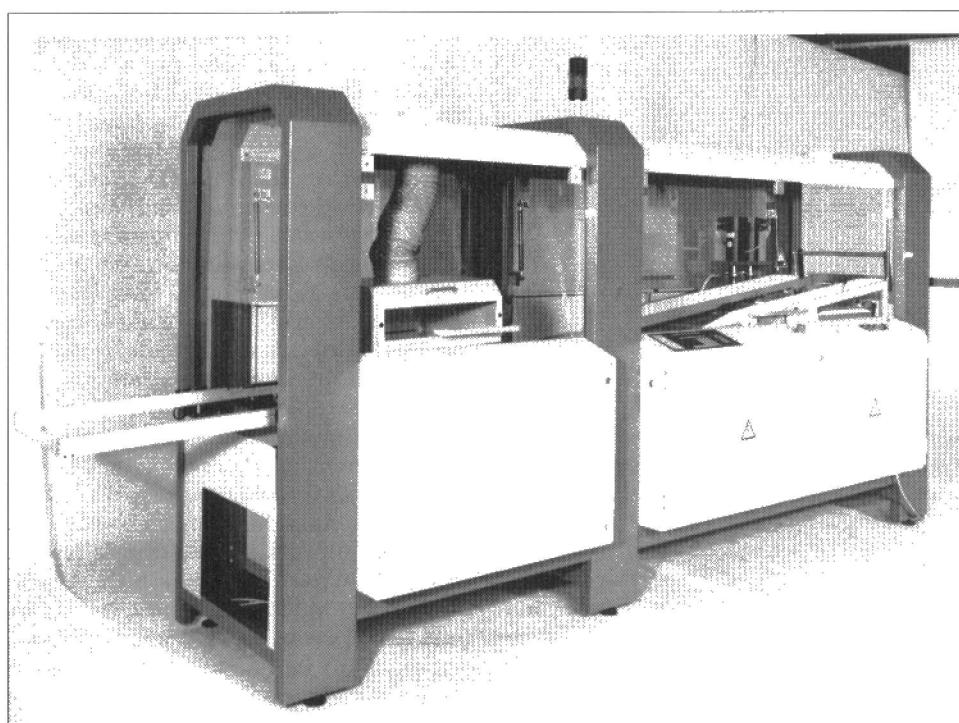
Wave soldering is a technique applied with leaded components, but also with SMDs (photograph courtesy Ersa).
